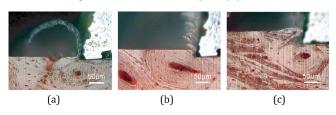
Cutting type of bone machining [3] (depth of cut: (a) 10 μ m, (b) 50 μ m and (c) 80 μ m, perpendicular direction).
